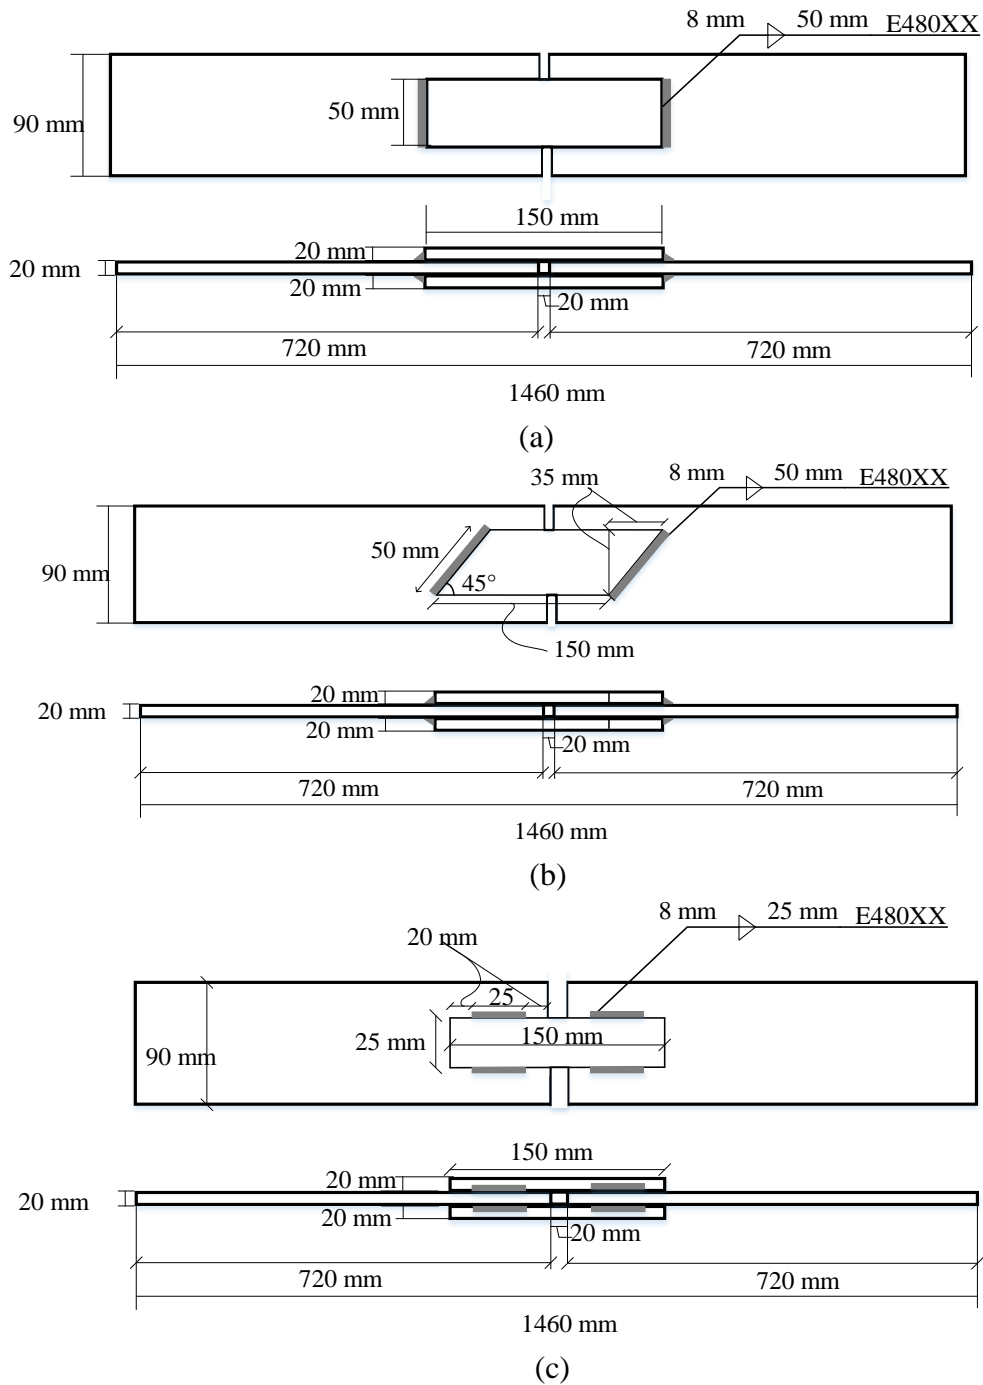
Welded lap joints configuration: (a) Transverse, (b) Inclined, (c) Longitudinal
